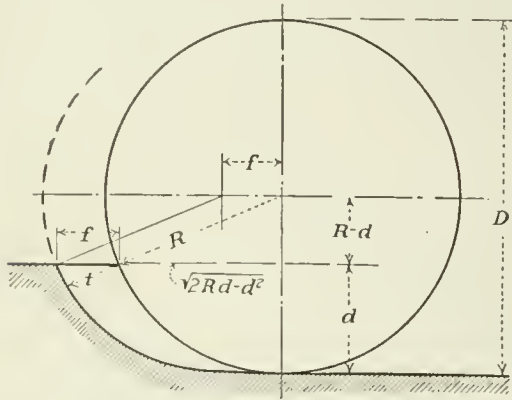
THICKNESS OF CHIP FOR SPIRAL OR SLABBING TOOLS
